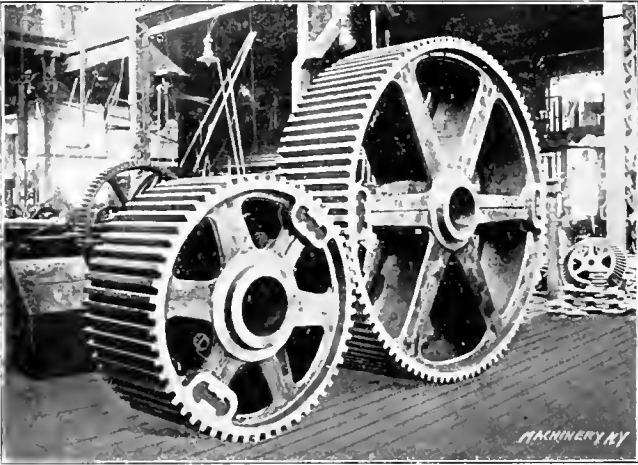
Heavy Cut Gears of Unusual Dimensions.
